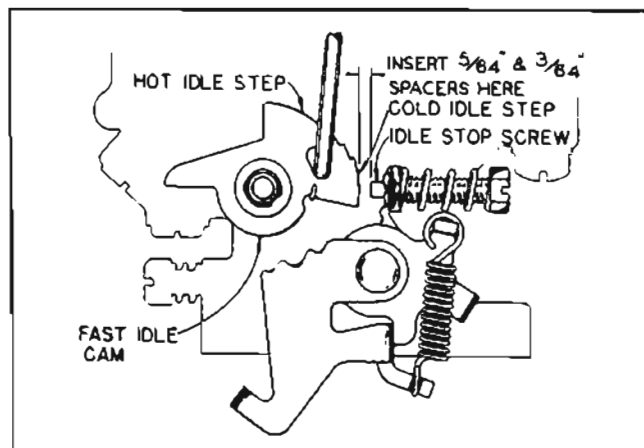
Spacer Between Idle Stop Screw and Fast Idle Cam
